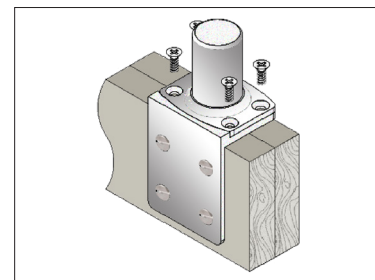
Figure D. (Right) Attach Rail Mounting Base with four (4) 5/16" x 1/2" machine screws.
